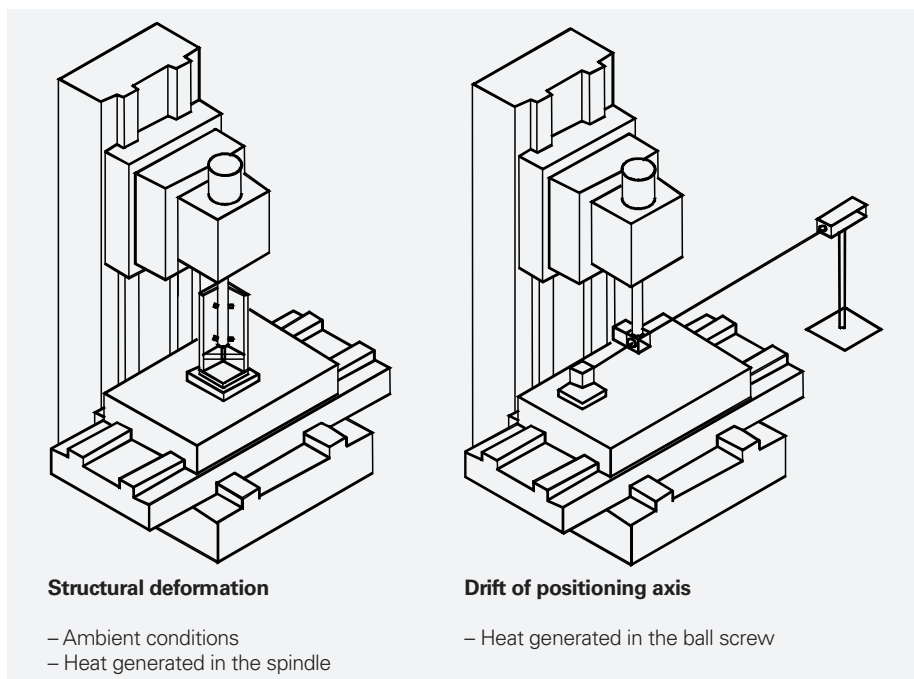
Measurement of thermal displacement of a machining center in accordance with ISO/DIS 230-3.
